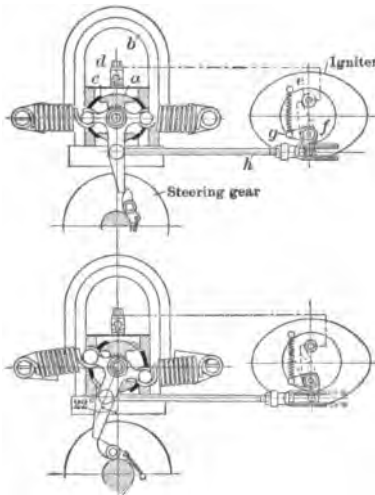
Make-and-Break Ignition Apparatus.
